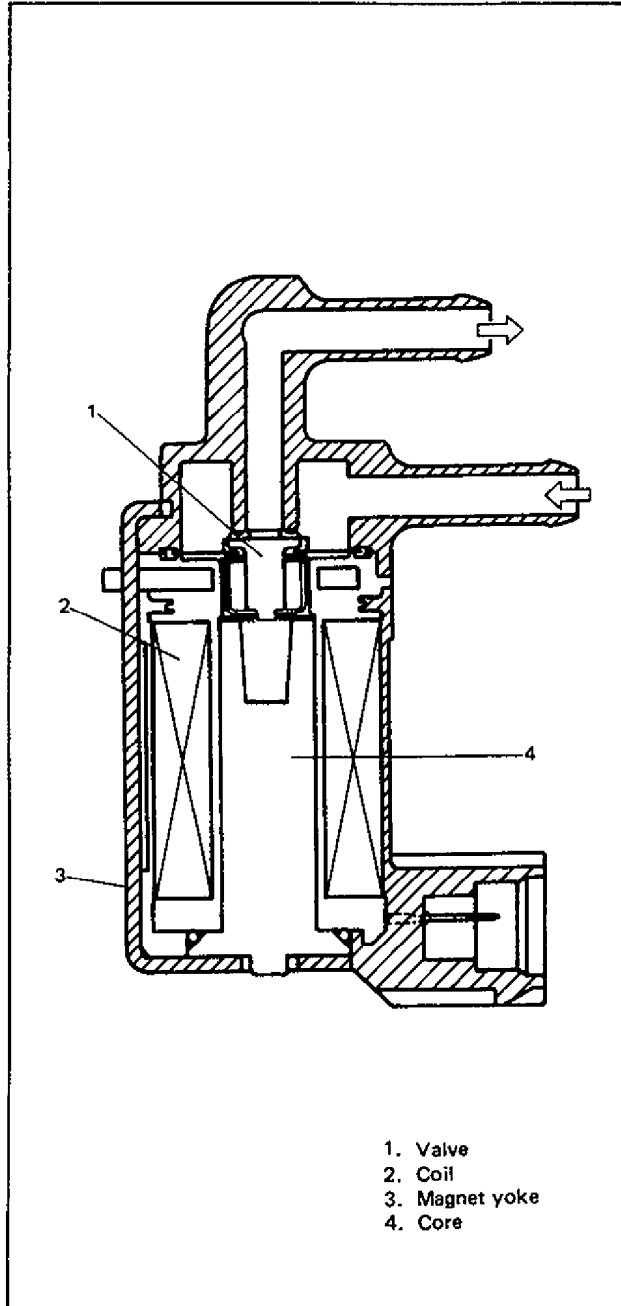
E-10-1 ISC Solenoid Valve Cross-Section
